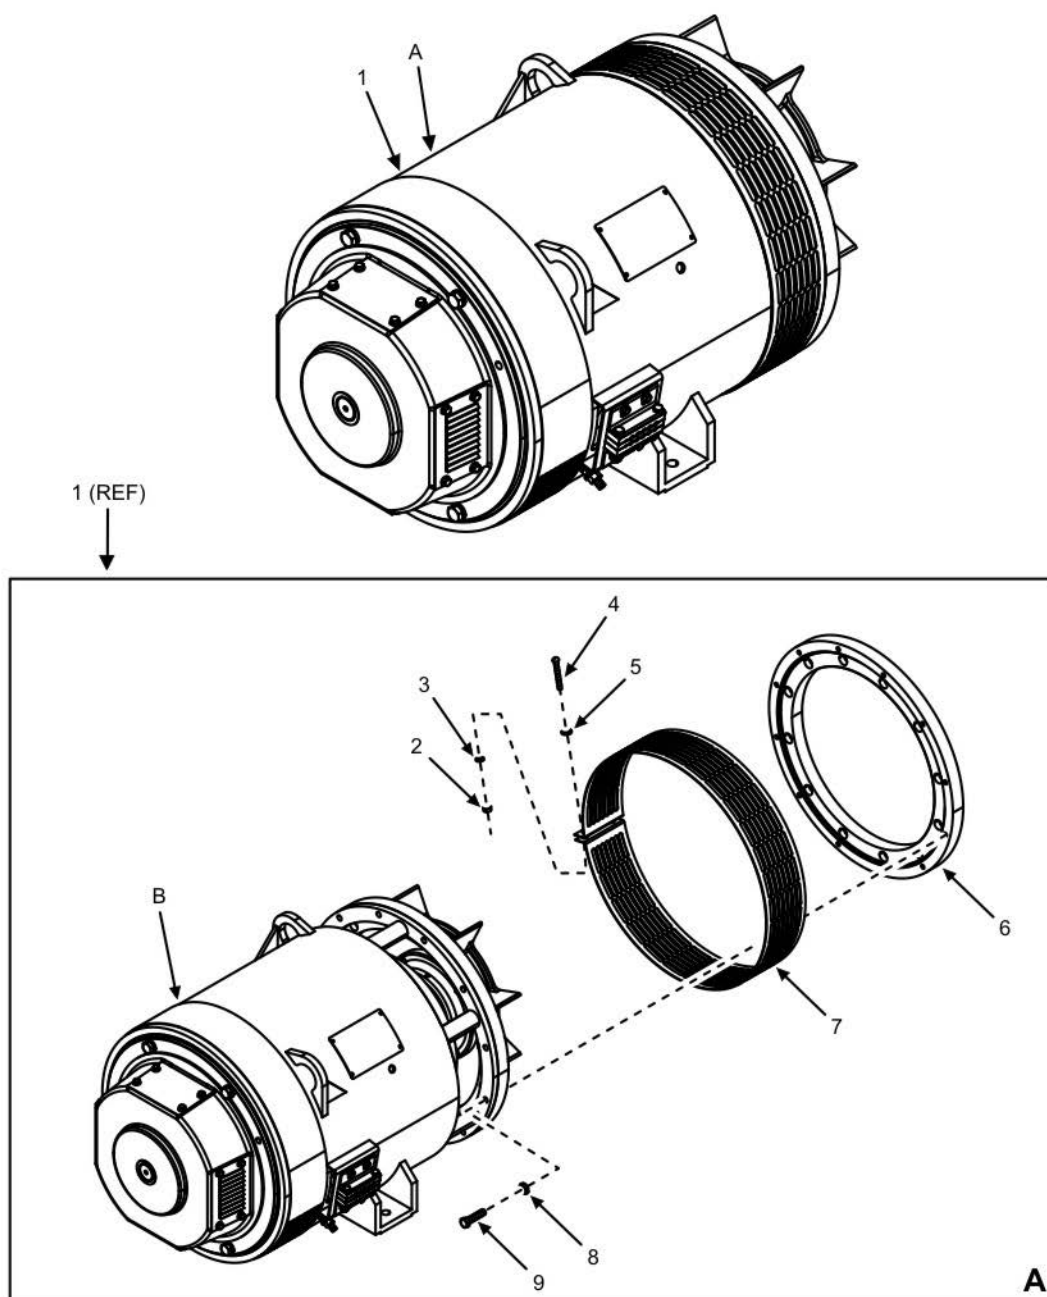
AC Generator Assembly, 400 Hz (Sheet 1 of 3).
